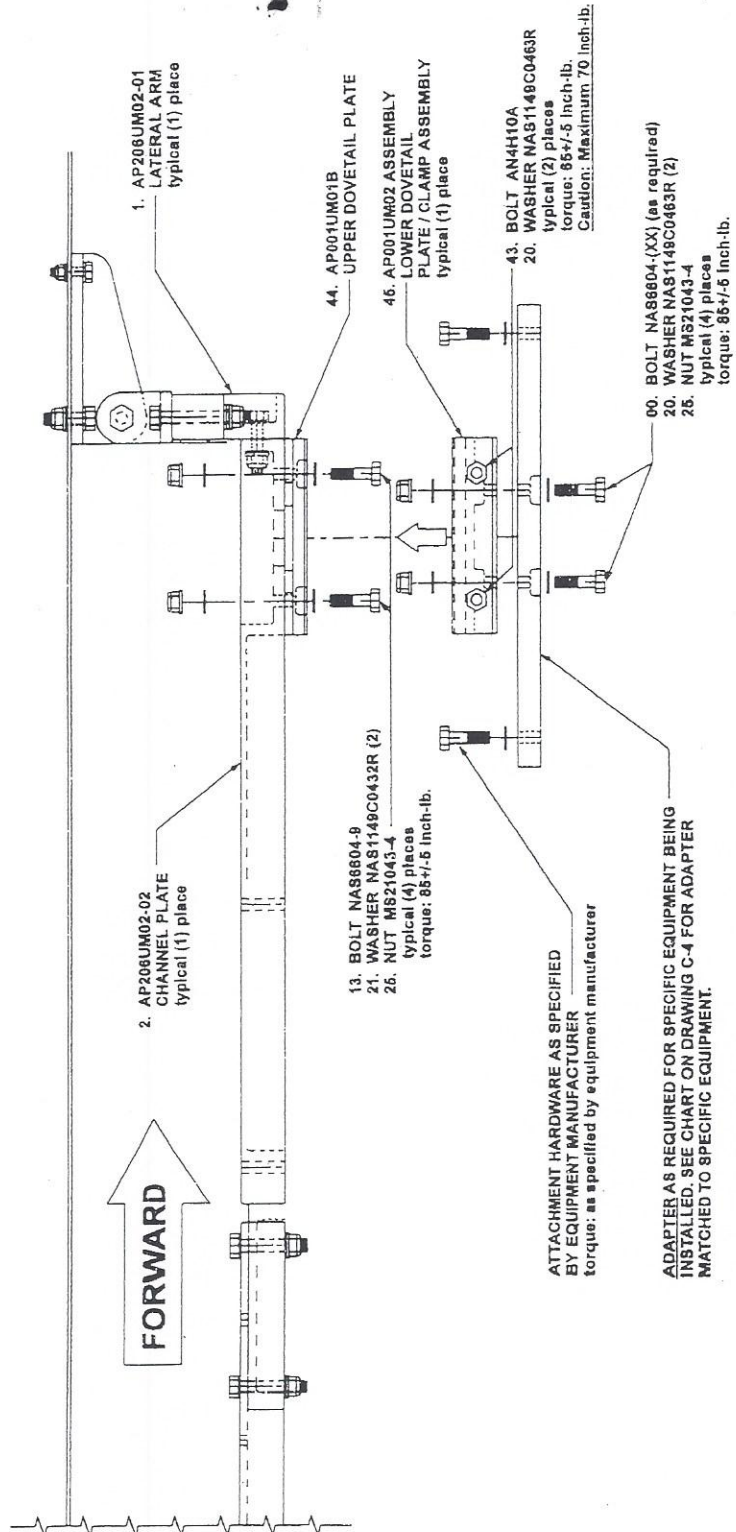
C-4 Side view, Adaptors & Direct Mounts
